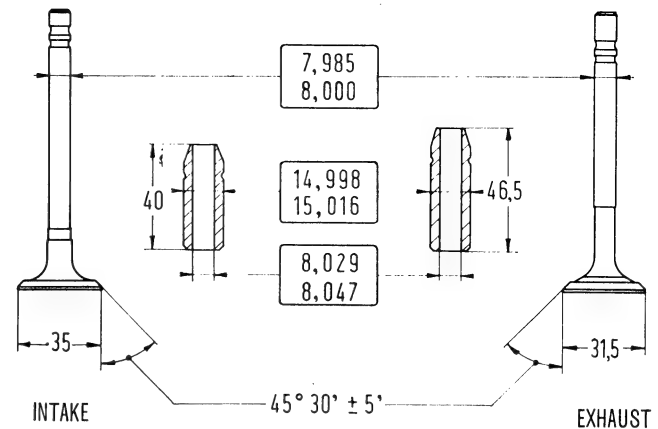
Critical dimensions of intake and exhaust valves and valve guides (in mm). Engine 115 C.005.
